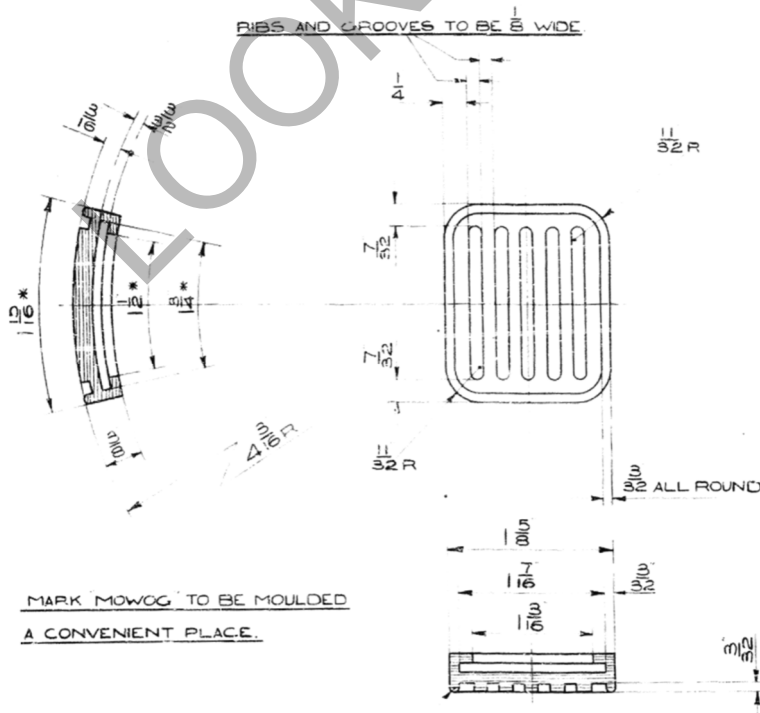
Brake and clutch pedal pad 2A5865.
